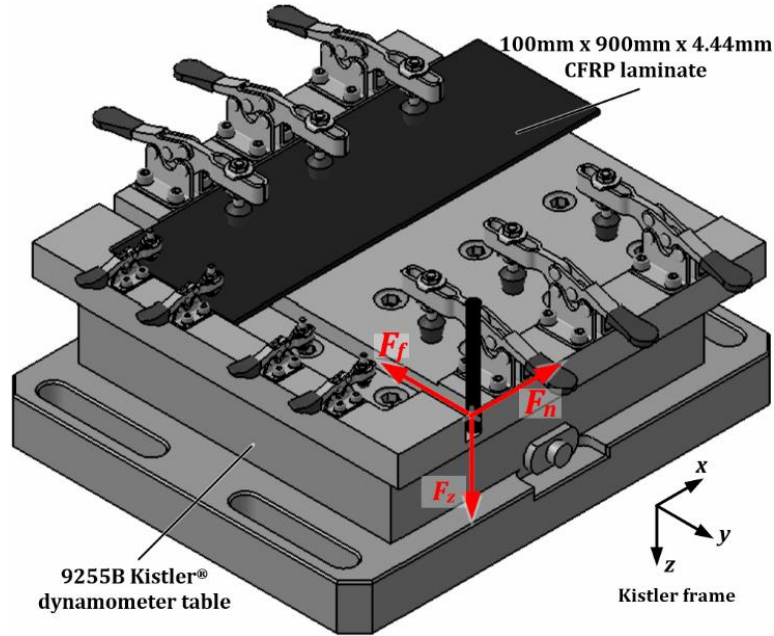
Experimental setup used for short cuts machining (100 mm)
